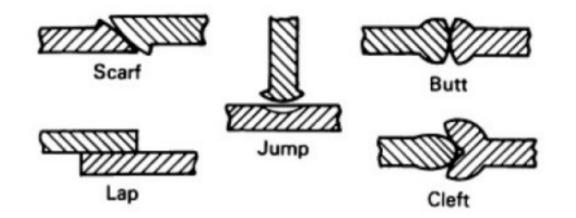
TYPICAL JOINT CONFIGURATIONS USED FOR MANUAL FORGE WELDING APPLICATIONS
